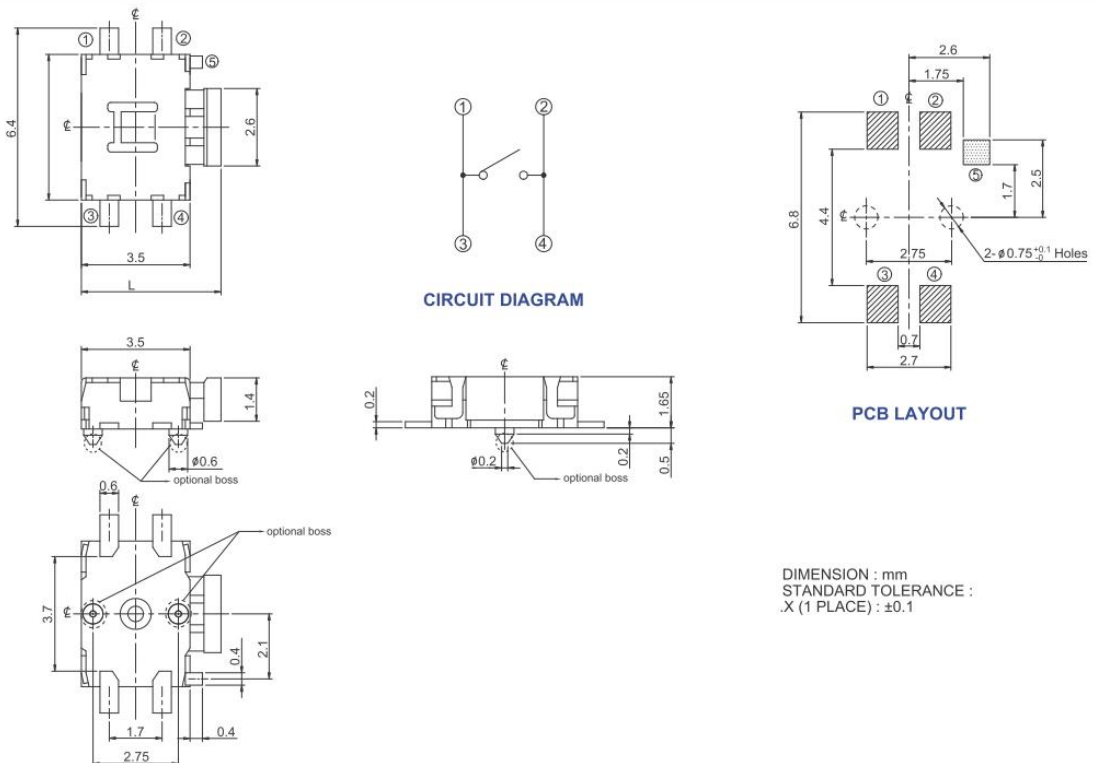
223HJ... Surface Mount J Bend, Without Ground Terminal
